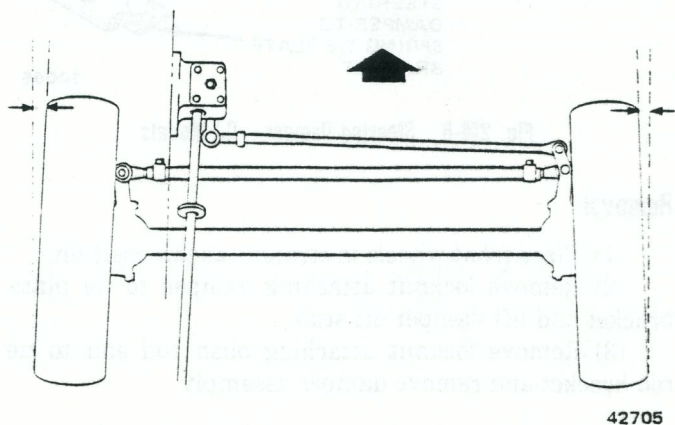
M-7 Front Wheel Toe-In (Top View)—Typical
